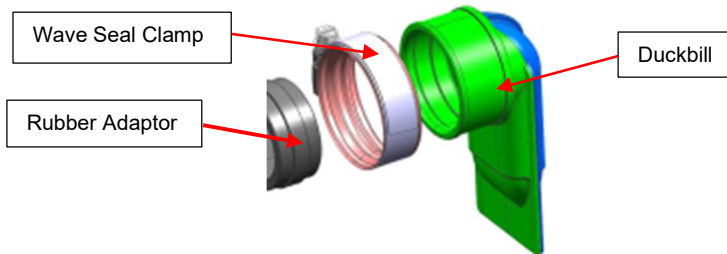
Rubber Adaptor, Duckbill & Wave Seal Clamp
